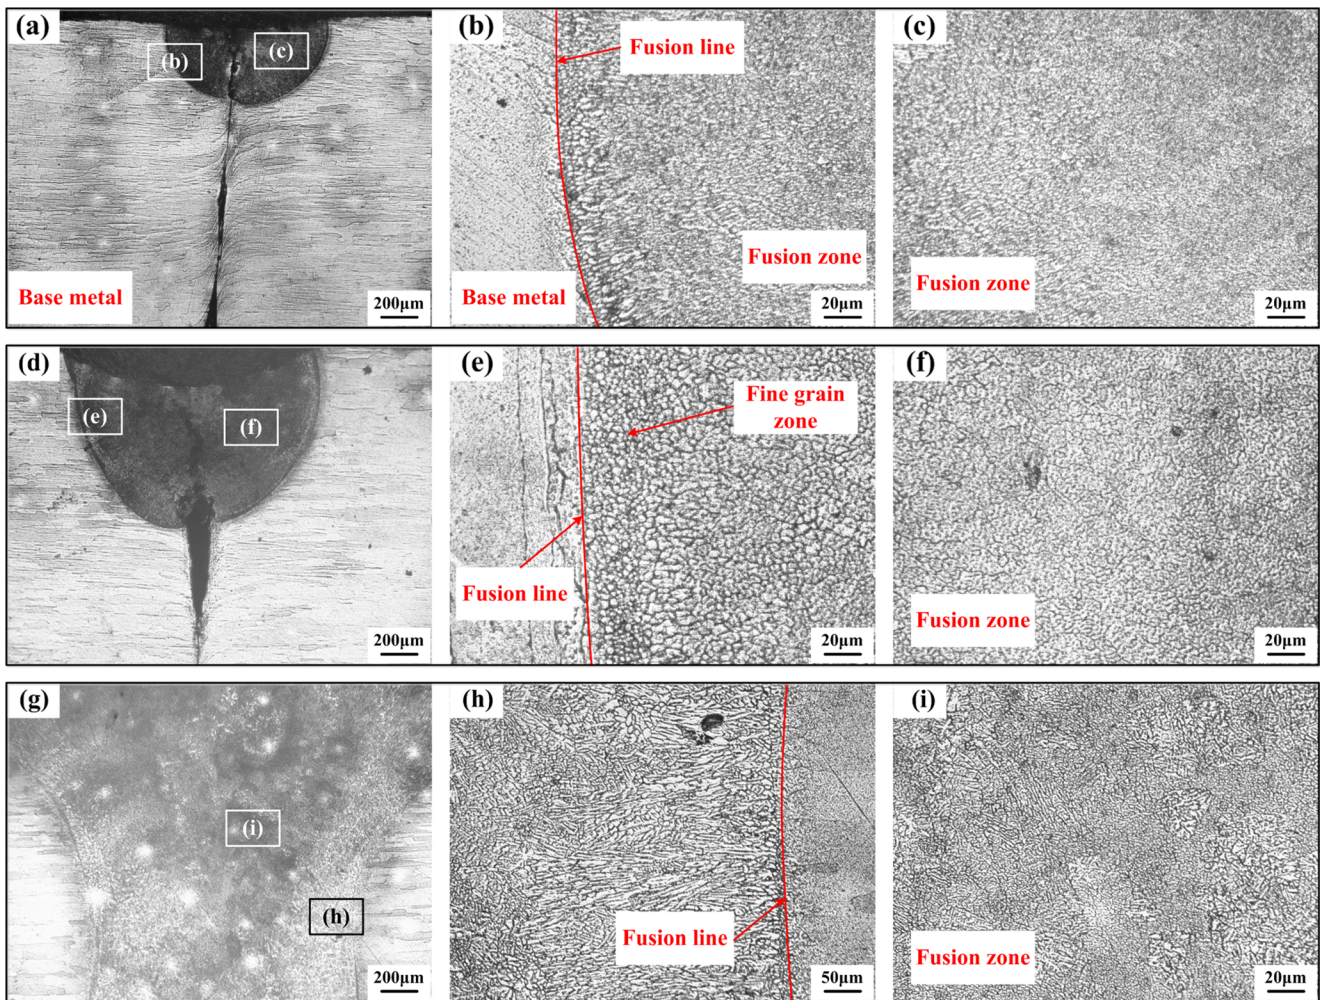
Morphologies and microstructures of the 2-mm-thick welded joint with different welding parameters: a $P = 1800$ W, $v = 3$ m/min, and $c = 2$ mm; b fusion line microstructure of weld bead in a; c fusion zone microstructure of weld bead in a; d $P = 2000$ W, $v = 3$ m/min, and
